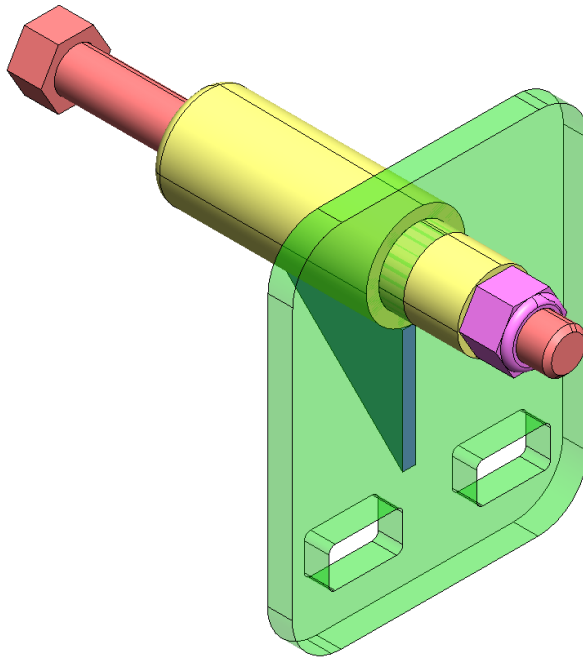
COLOUR-CODED CHAIN-HALF OF THE SHELF CONNECTION SUBASSEMBLY.
